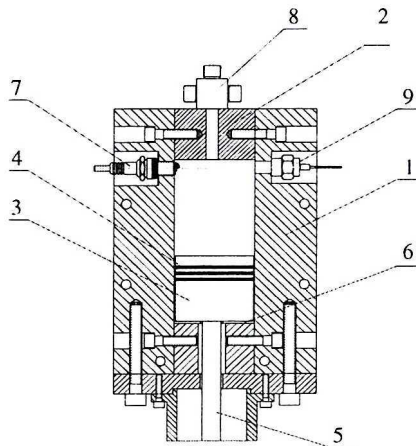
Design details of the research section: 1 – side parts of the cylinder; 2 – top part of the cylinder; 3 – piston; 4 – piston seals; 5 – piston rod; 6 – piston bottom rubber gasket; 7 – spark plug; 8 – mixture feeding unit; 9 – pressure transducer
